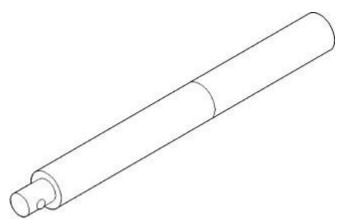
INSERT, CRANKSHAFT - 8513A Courtesy of CHRYSLER LLC
